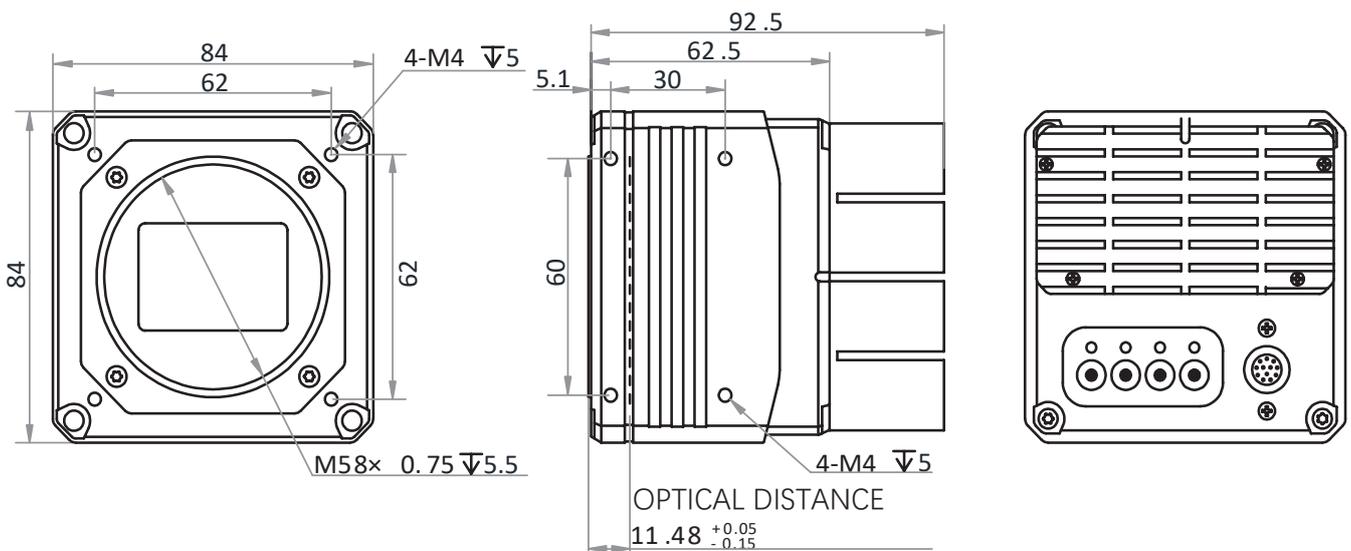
84 * 84 * 92.5 mm mechanical dimensions of the CoaXPress camera with M58, which adopts M4 specification screws.
